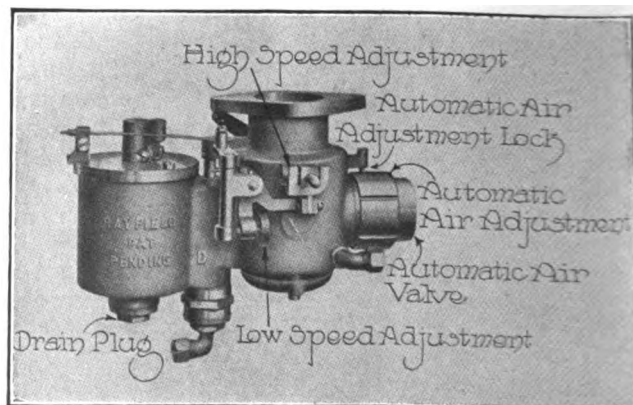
Rayfield Carburetor, with Components Utilized in Adjusting and Cleaning Lettered.
